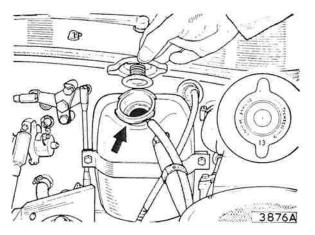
The expansion tank and pressure cap. (Inset shows the pressure cap fitted to cars with Air-Conditioning Equipment).
